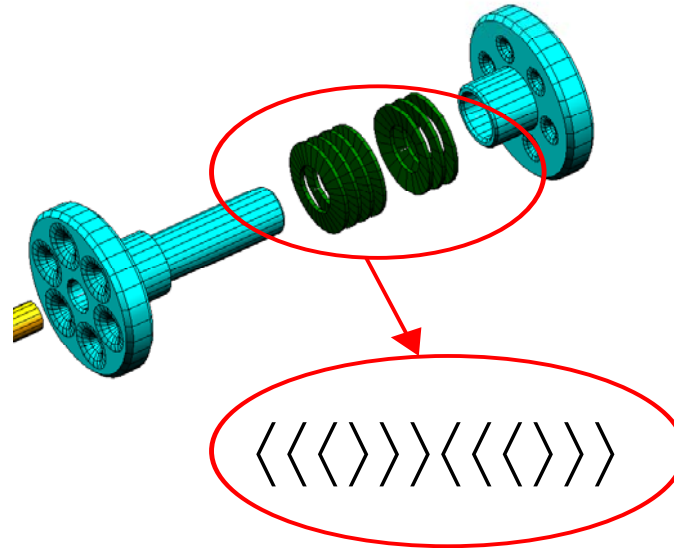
Stacking arrangement of Belleville spring washers on central hub.
